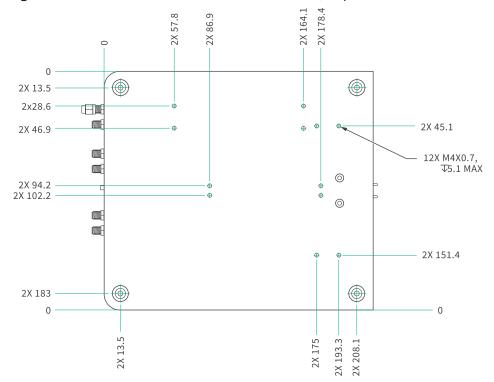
mmRH-5592 Mechanical Dimensions, Top View
